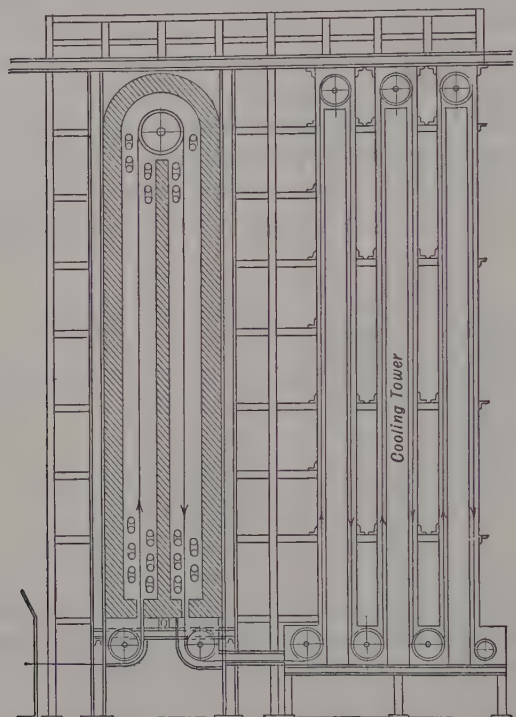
Tower-type furnace for annealing strip steel. In the heating tower (left) radiant tubes are provided all the way up.
